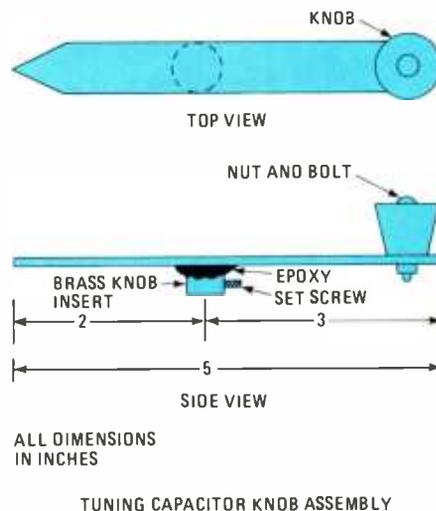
The metal pointer was constructed from a discarded brass-plated lid support; use a piece of solid brass or copper. Drill a 1/8-inch hole to secure the small radio knob and epoxy the 1/4-inch shaft insert to the under side of the dial pointer to attach to the shaft to the tuning capacitor.
